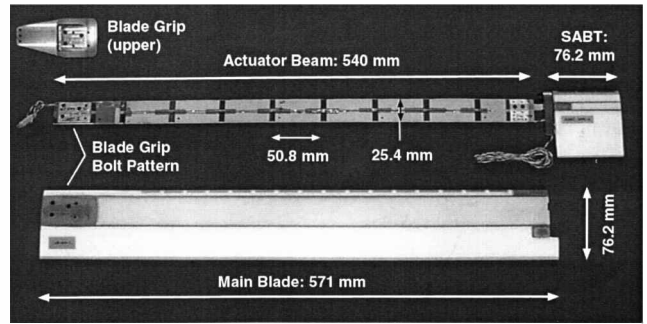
Fabricated components for the Mach-scale active tip rotor, SABT-M99.
